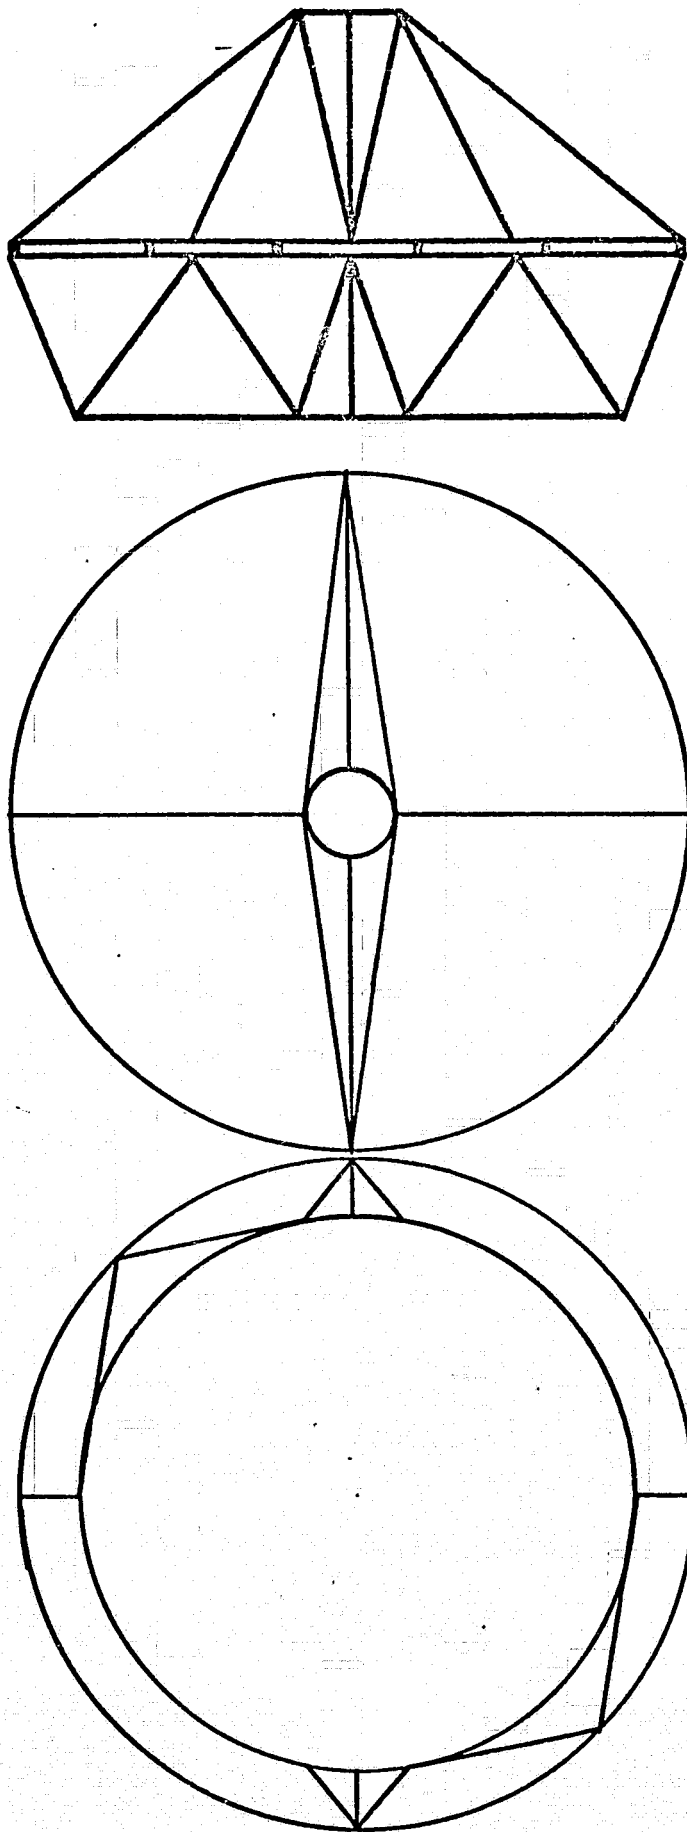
SIDE, TOP, AND BOTTOM VIEWS OF ADAPTER FOR UPPERMOST SPACECRAFT
